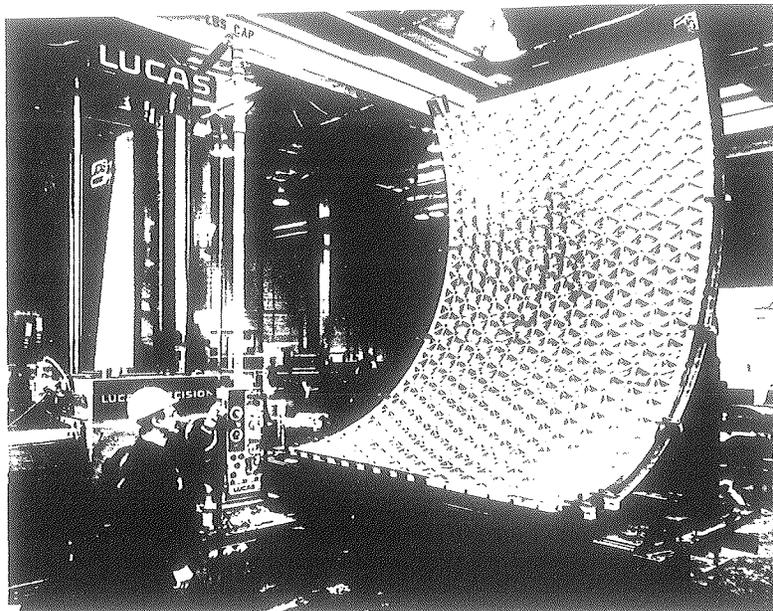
Machining weld preparation in formed isogrid panel.
